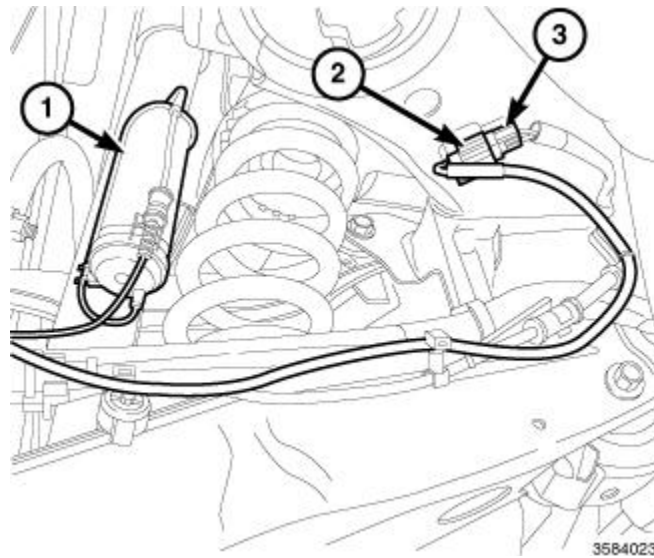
Shock Solenoid Assembly & ADS Harness Connector
